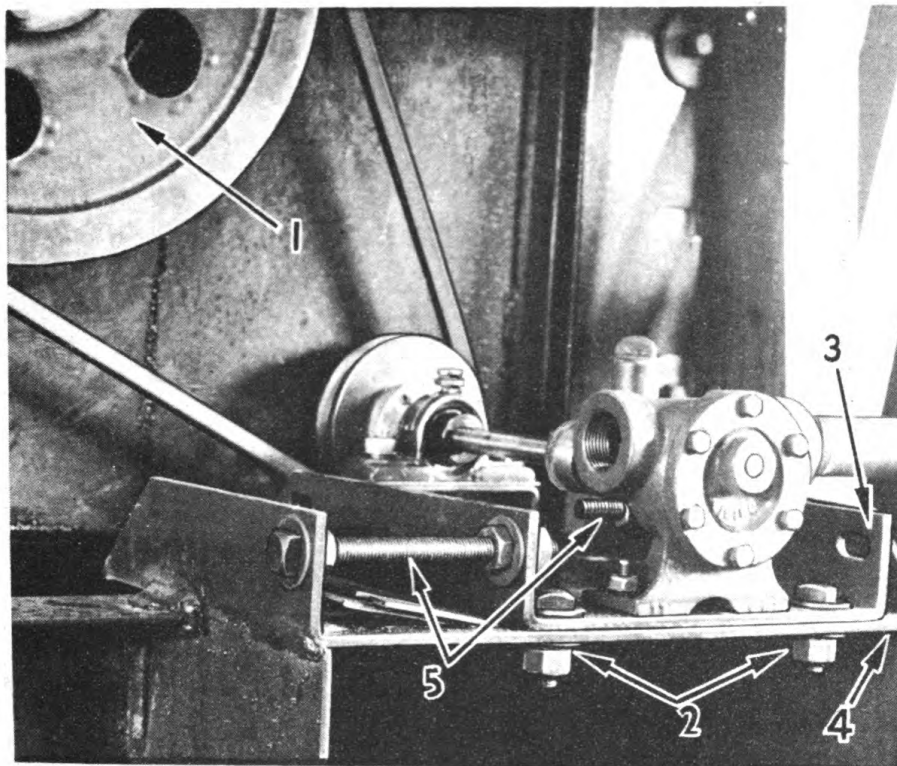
ADJUSTMENT OF V-BELT TO FUEL PUMP.
